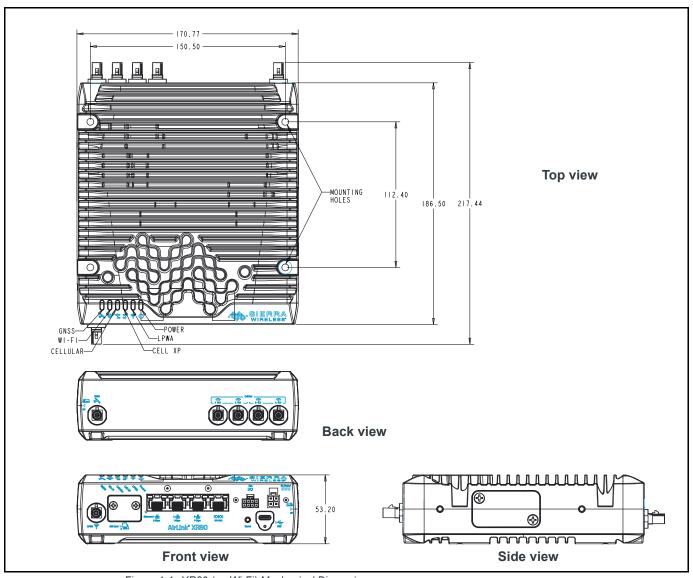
XR80 (no Wi-Fi) Mechanical Dimensions
